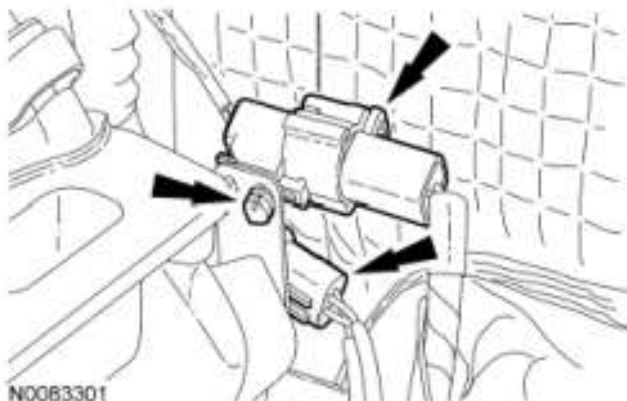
Locating Ignition Coil Electrical Connectors And Engine Wiring Harness Retainers
